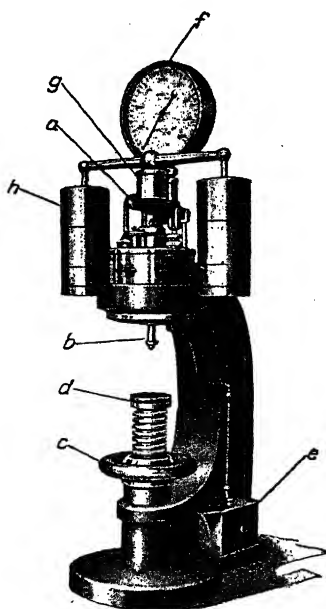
BRINELL HARDNESS TESTING MACHINE.
